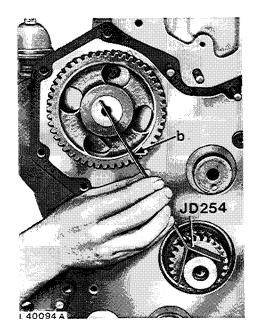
Timing Camshaft Gear by Means of Timing Tool No. JD 254
